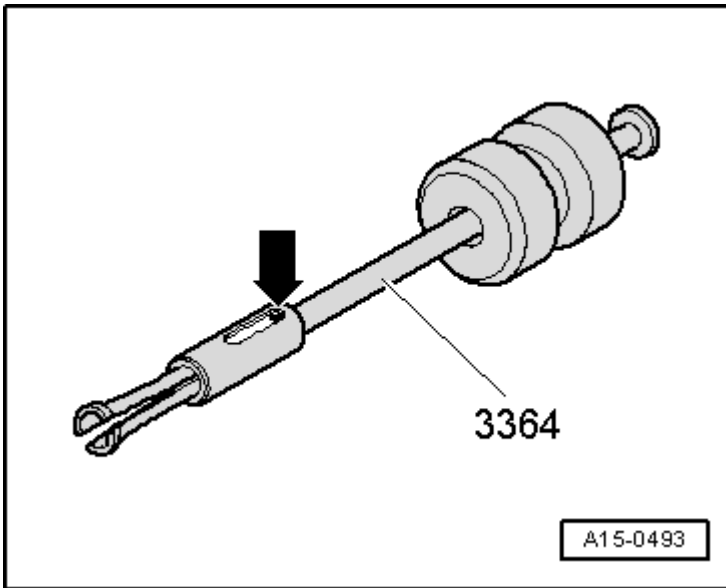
Identifying Direction To Drive Out Spring Dowel Sleeve
